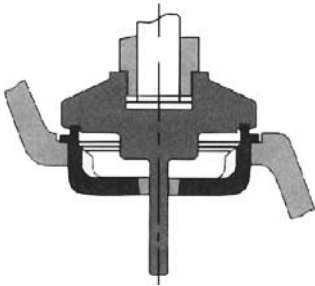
Soft-plug design. (Courtesy of Pacific Valve Group, a unit of the Crane Valve Group)
